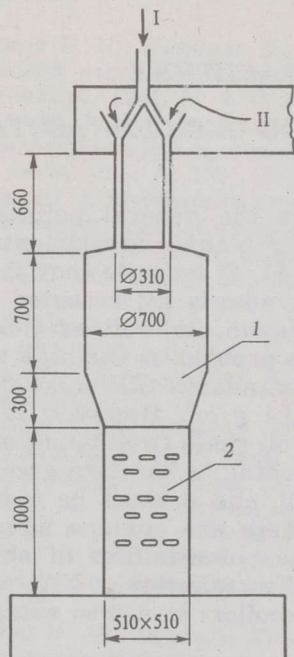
Design of direct-flow combustor with a belt staggered tube bank. Legends: 1 — forechamber, 2 — staggered tube bank section; I — pulverized fuel/air mixture, II — secondary air
